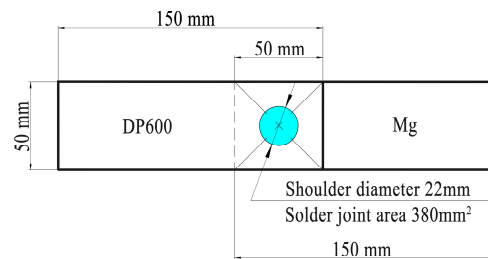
The lap joint diagram of friction stir keyholeless spot welding (FSKSW).
